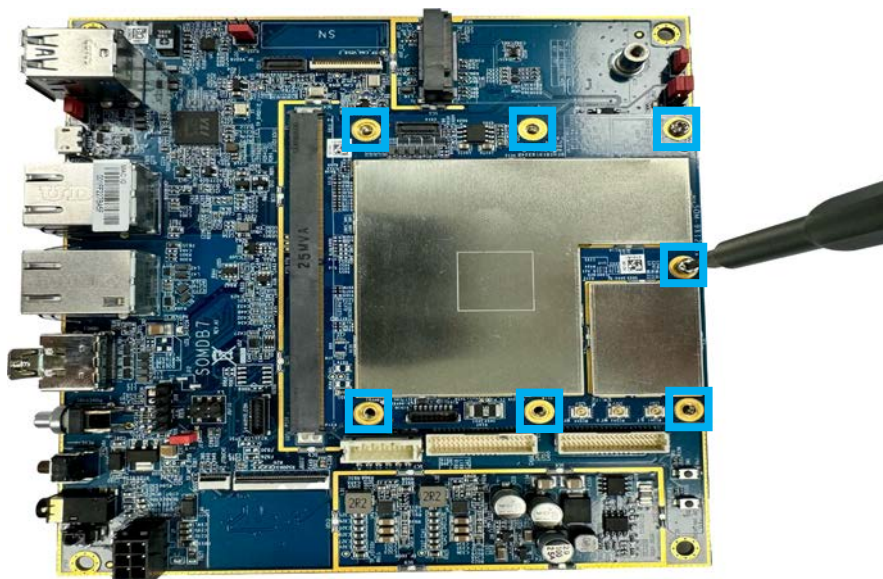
Securing the VIA SOM-7000 module on the VIA SOMDB7 carrier board
